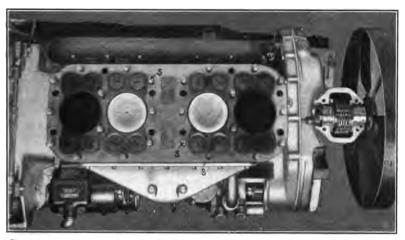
Sixteen-valve, 4-cylinder White engine with cylinder head removed. (Its manufacture has been discontinued).
